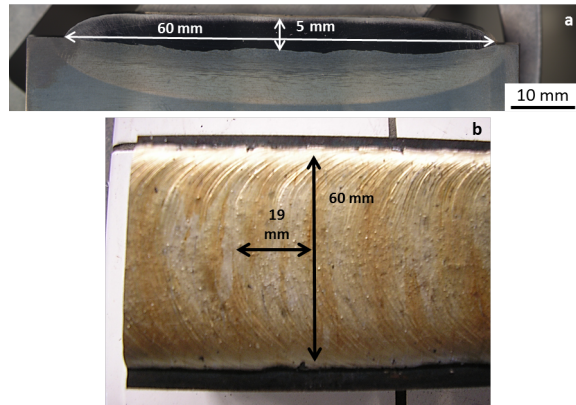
Macrographs of the mono-layer weld: a- longitudinal section; b- top view.
